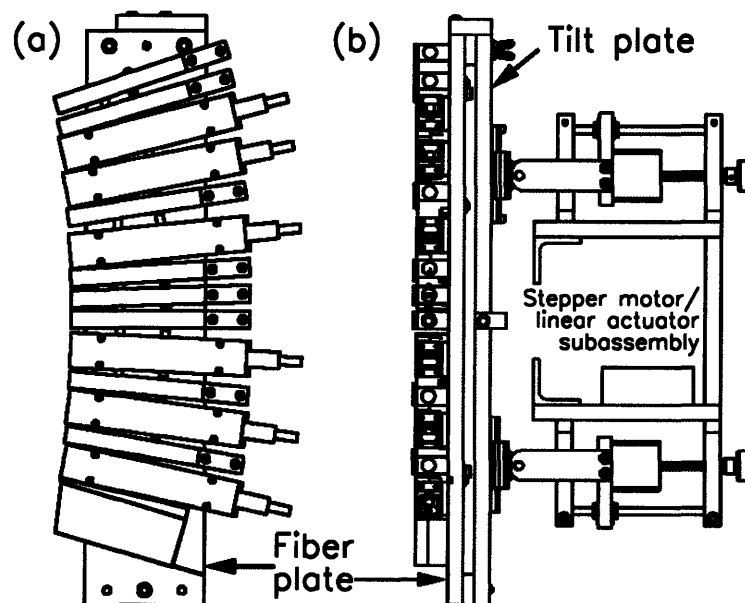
TS fiber mount assembly from a) side and b) rear, showing the linear actuators for horizontal position and tilt adjustment.
